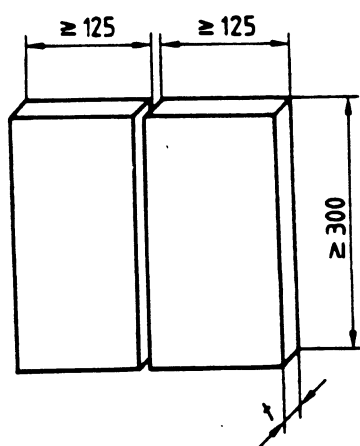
Dimensions of test piece for a butt weld in plate
